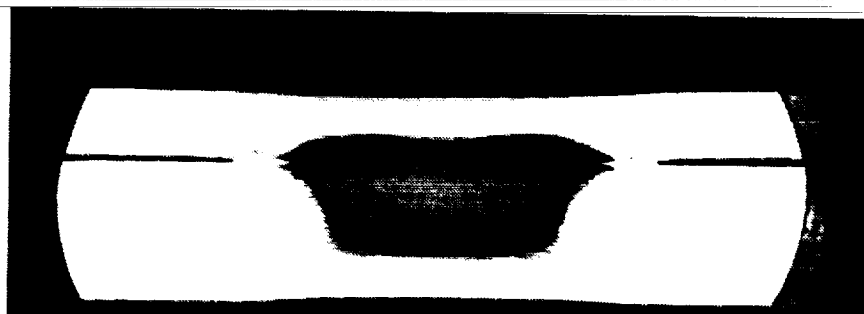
Repaired Undersized Spot Weld in 0.090" 2090-T62 joined to 0.190" 2090-T83 Al-Li.
